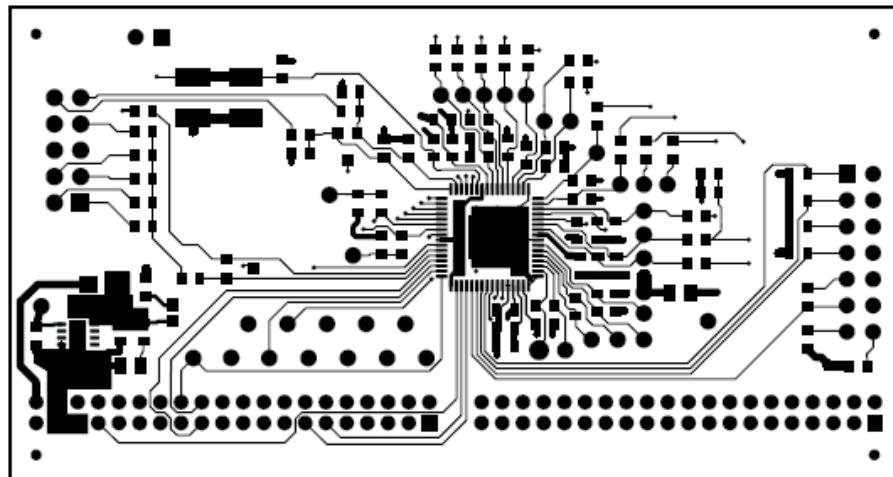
UCD3138CC64EVM-030 Top Copper (top view)
